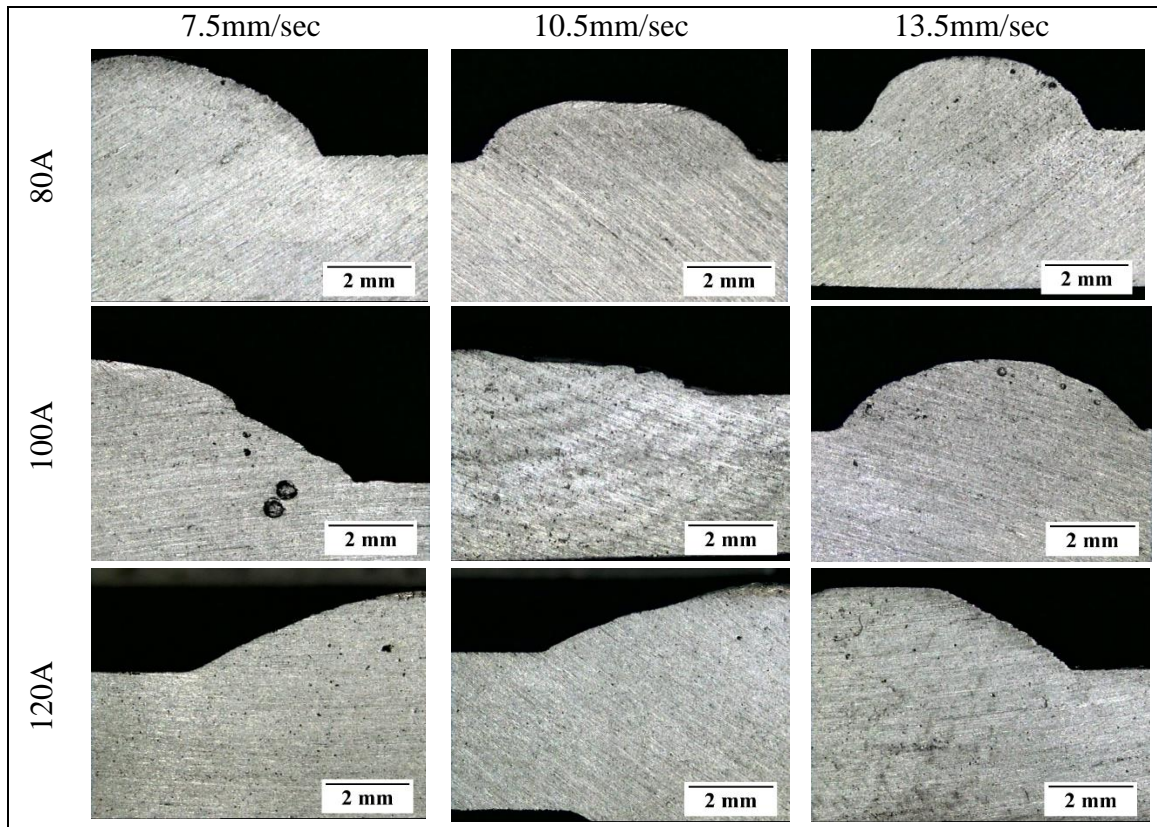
Macro-images of MIG P weld bead
